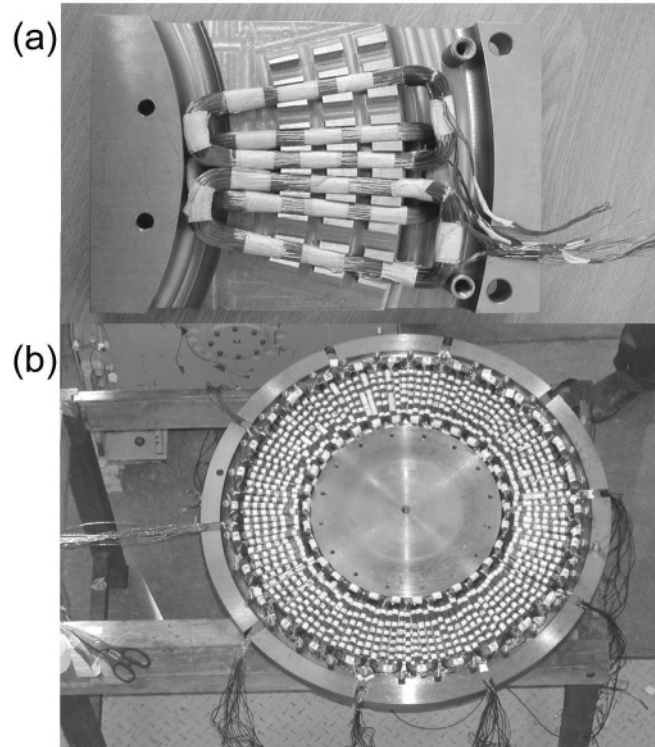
Moulds for positioning the coils: (a) mould with guide slots; (b) mould with guide pins.
